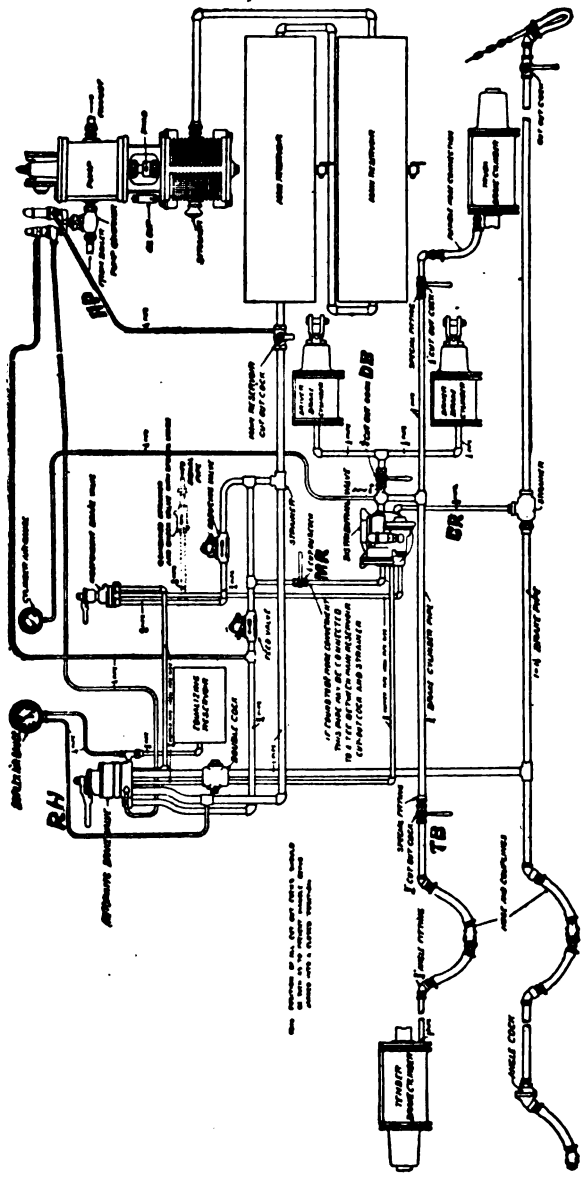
Standard Arrangement of Piping and Cut-Out Cocks in the ET Engine and Tender Brake Equipment
